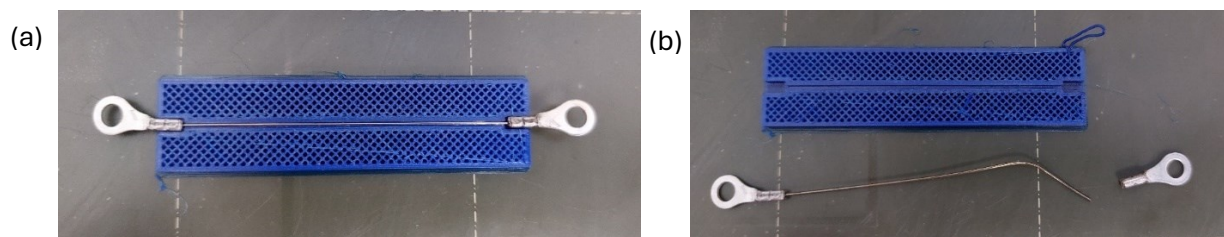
4 – specimen after wire insertion during the pause (a) and wire breaking following impact with the nozzle (b)
